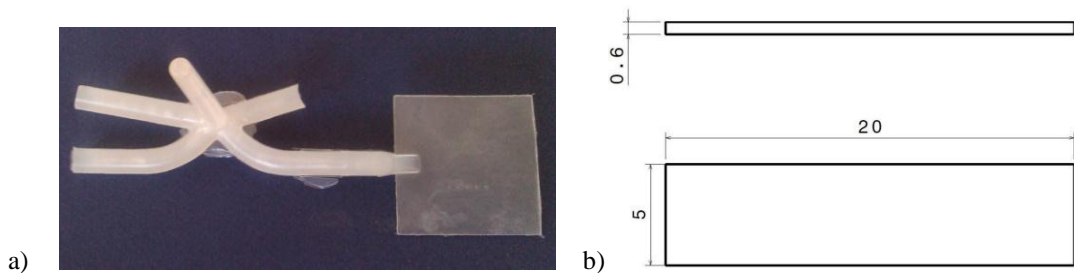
Second geometry: a) plate with runner system, b) dimensions of cut sample
